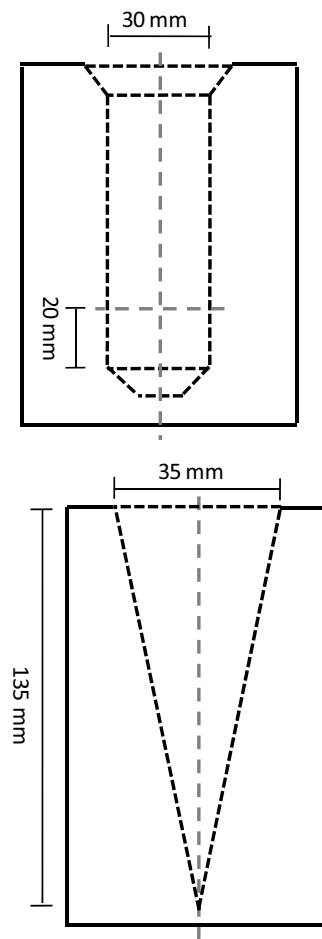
Sketch of the moulds used during the study: (a) 30 mm cylindrical steel mould and (b) wedge-shape copper mould.
